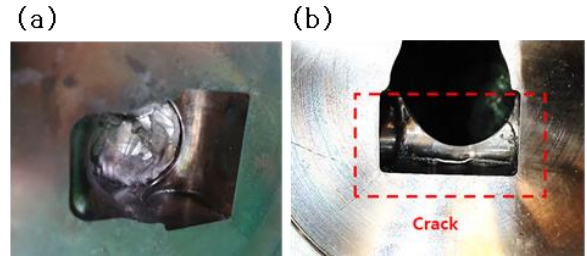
Die status after 1st forging (a) bottom view, (b) top view
